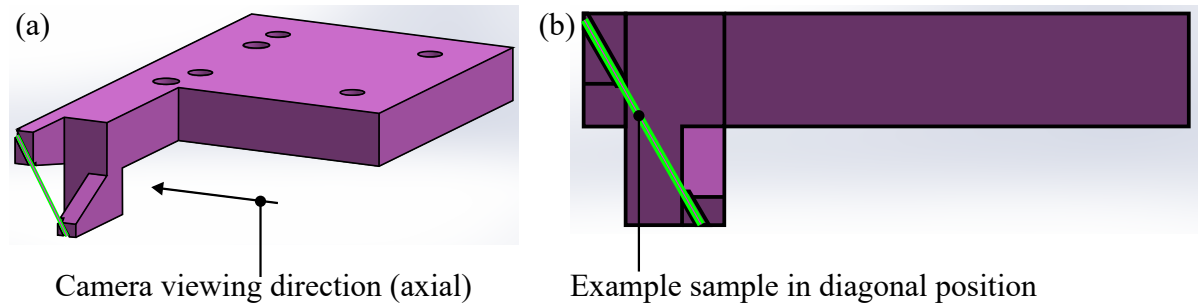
3D-printed sample holder used for the thread cut demonstrations. (a) Isometric CAD view of the holder geometry and mounting features (camera direction indicated). (b) Front view illustrating the diagonal thread sample orientation (green) used to maintain an unobstructed axial line-of-sight to the blade–sample contact region during approach (cf. Fig. 5.1).
